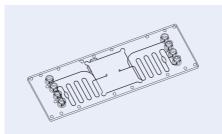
Schematic drawing of basic sensor platform II - Fluidic1005
